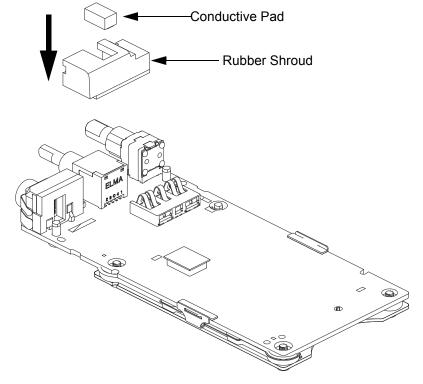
Conductive Pad and Rubber Shroud Reassembly.
